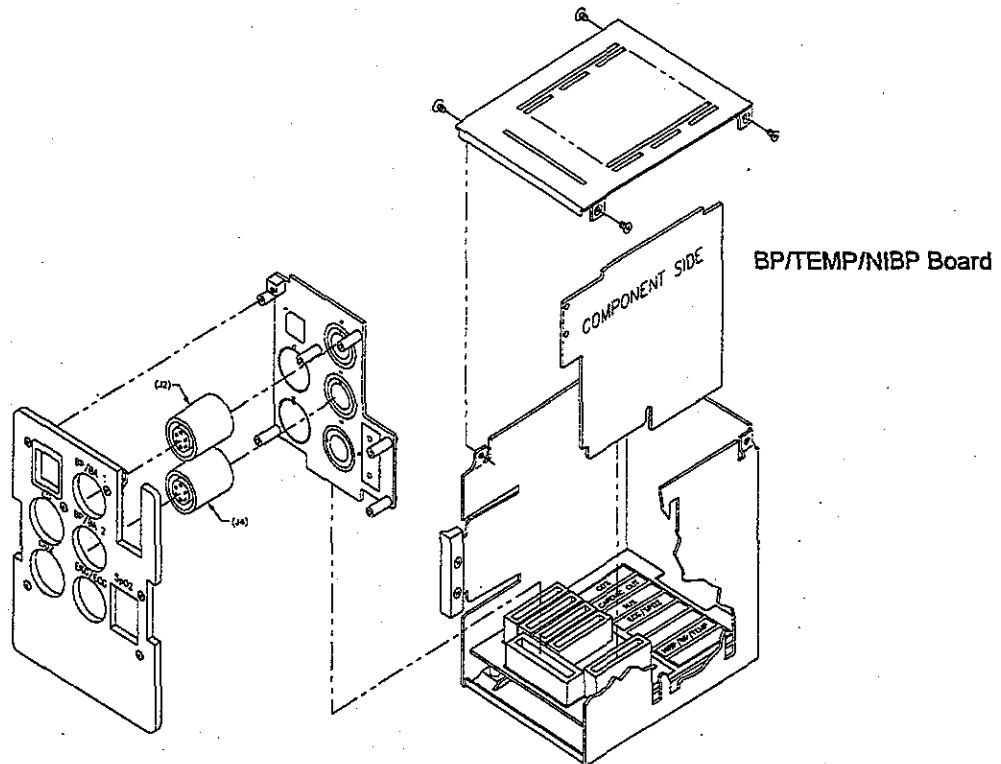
Two Invasive Blood Pressure Option - Exploded View
